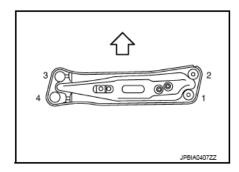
Identifying Tightening Sequence Of Rear Engine Mounting Member Bolts Courtesy of NISSAN NORTH AMERICA, INC.
